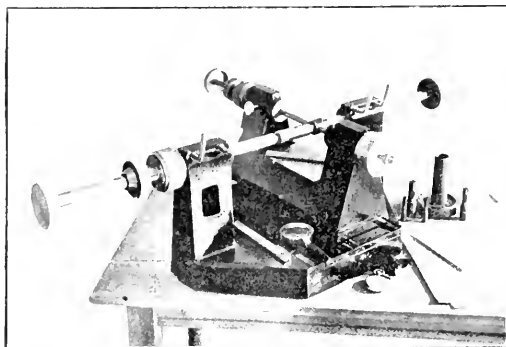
APPARATUS FOR MAKING WIRE MEASUREMENTS USING TWO WIRES
